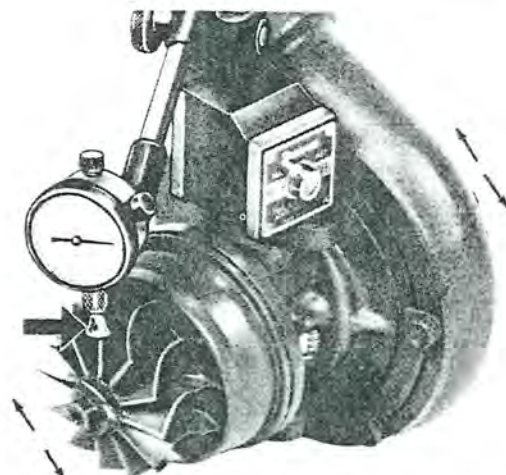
Dial Indicator Installed To Measure Radial Movement
